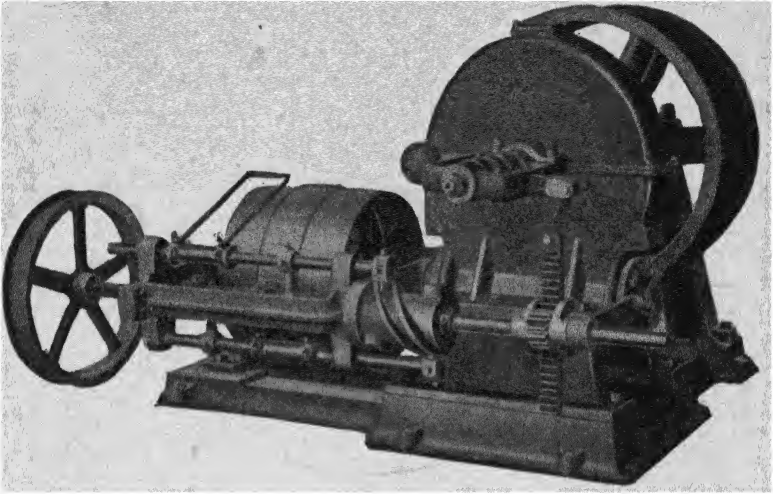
Floor Type of Worm-Gearred Machine with Cylindrical-Cam Belt Shipper
